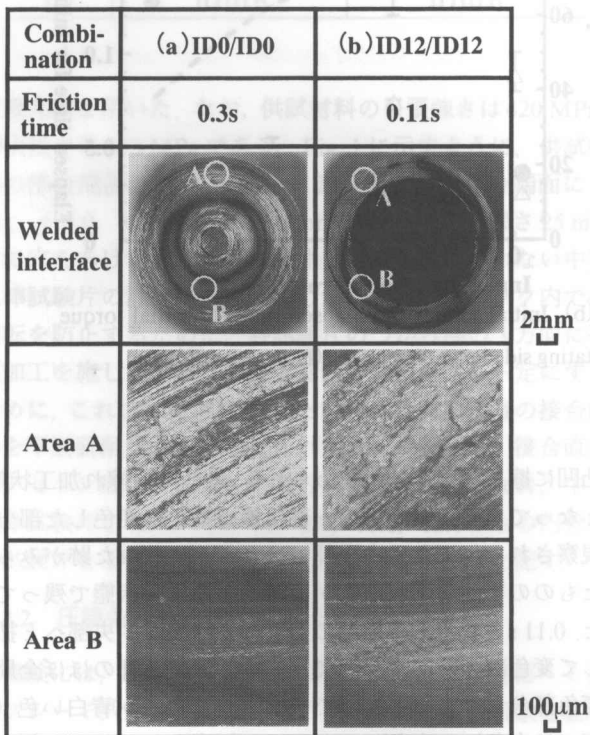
Appearances and microstructures of welded interfaces after welding under various inner diameters of pipes (Exp. series ①).
